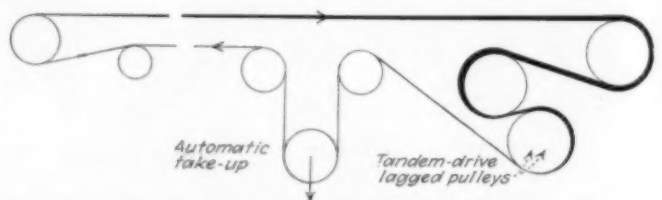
Class IV Conveyor, Lagged Tandem Drive Pulleys, Automatic Take-up
